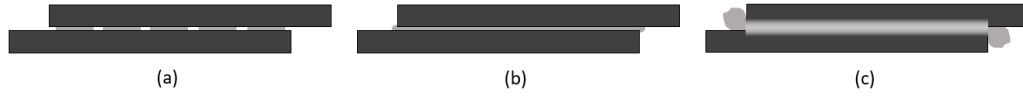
Different types of specimens produced with weld defined qualities. (a) specimens with interspersed welded and unwelded areas (Batch 1), (b) specimens with fully welded joints (Batch 2), and (c) specimens with fiber bundle distortion (Batch 3). Batch 2 specimens designate the nominal condition, while batch 1 and 3 represent a defective condition. Figure drawn based on [70].
